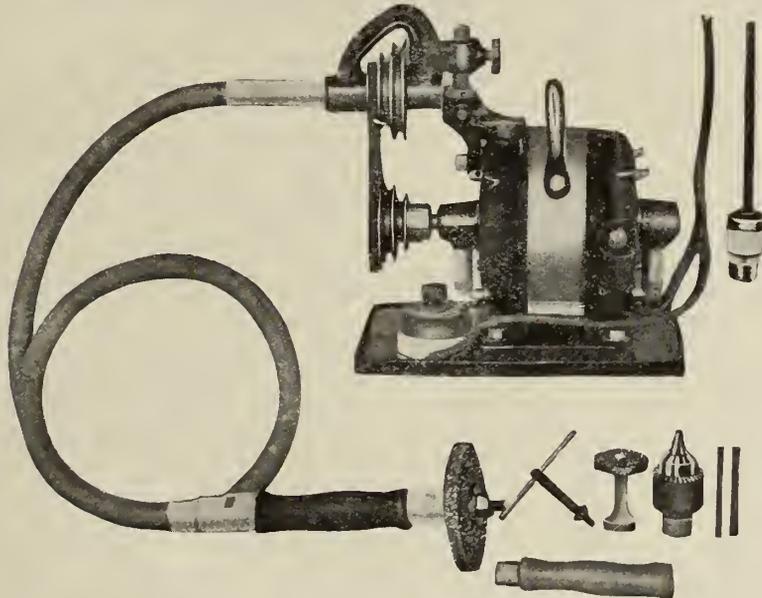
FLEXIBLE SHAFT OUTFIT FOR LIGHT GRINDING, POLISHING AND DRILLING.
